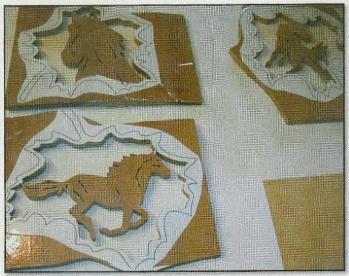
Attach the sheet of Baltic birch to the back side of your cut-out patterns.
